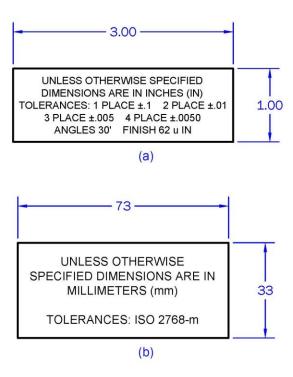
(a) Dimensioning and tolerancing block dimensions recommended by ASME Y14.1 for all inch-size sheets. (b) Dimensioning and tolerancing block dimensions recommended by ASME Y14.1M for all metric-size sheets.
